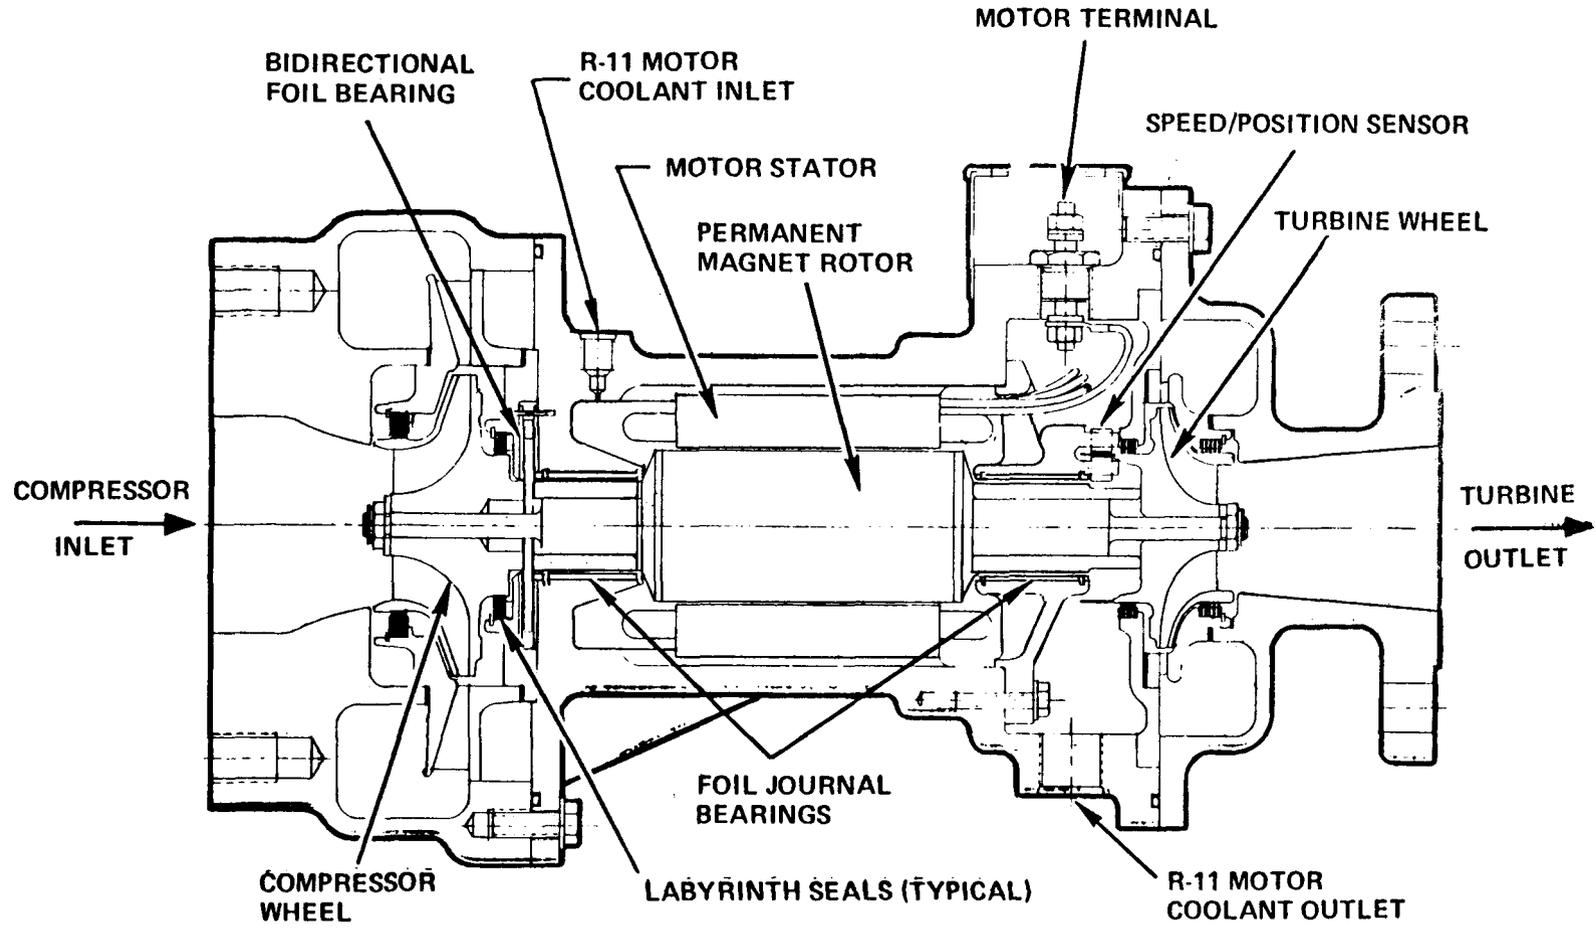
COMPRESSOR WITH IMPELLERS ON BOTH ENDS OF THE SHAFT
